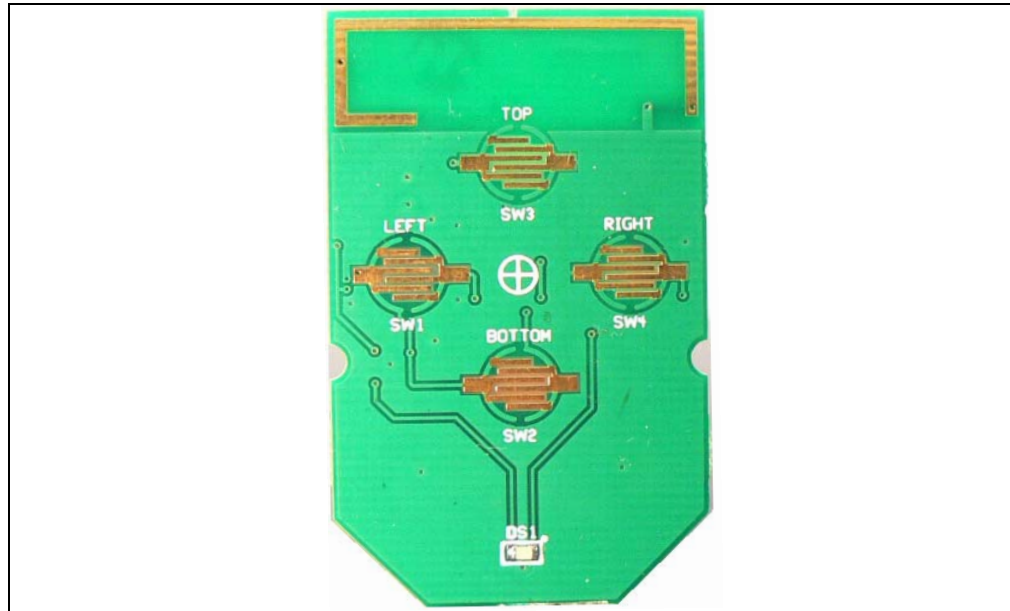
shows the bottom layer of the PCB. The bottom layer shows the PCB loop antenna and the PCB traces for the conductive push buttons from the plastic enclosure.
